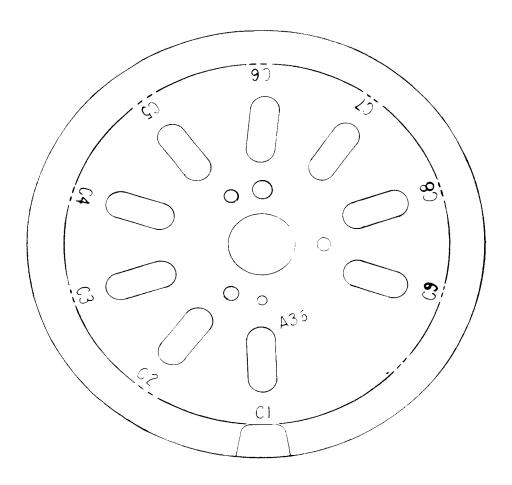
10 kHz Rotor Subassembly A2A4A36, Component Locations
